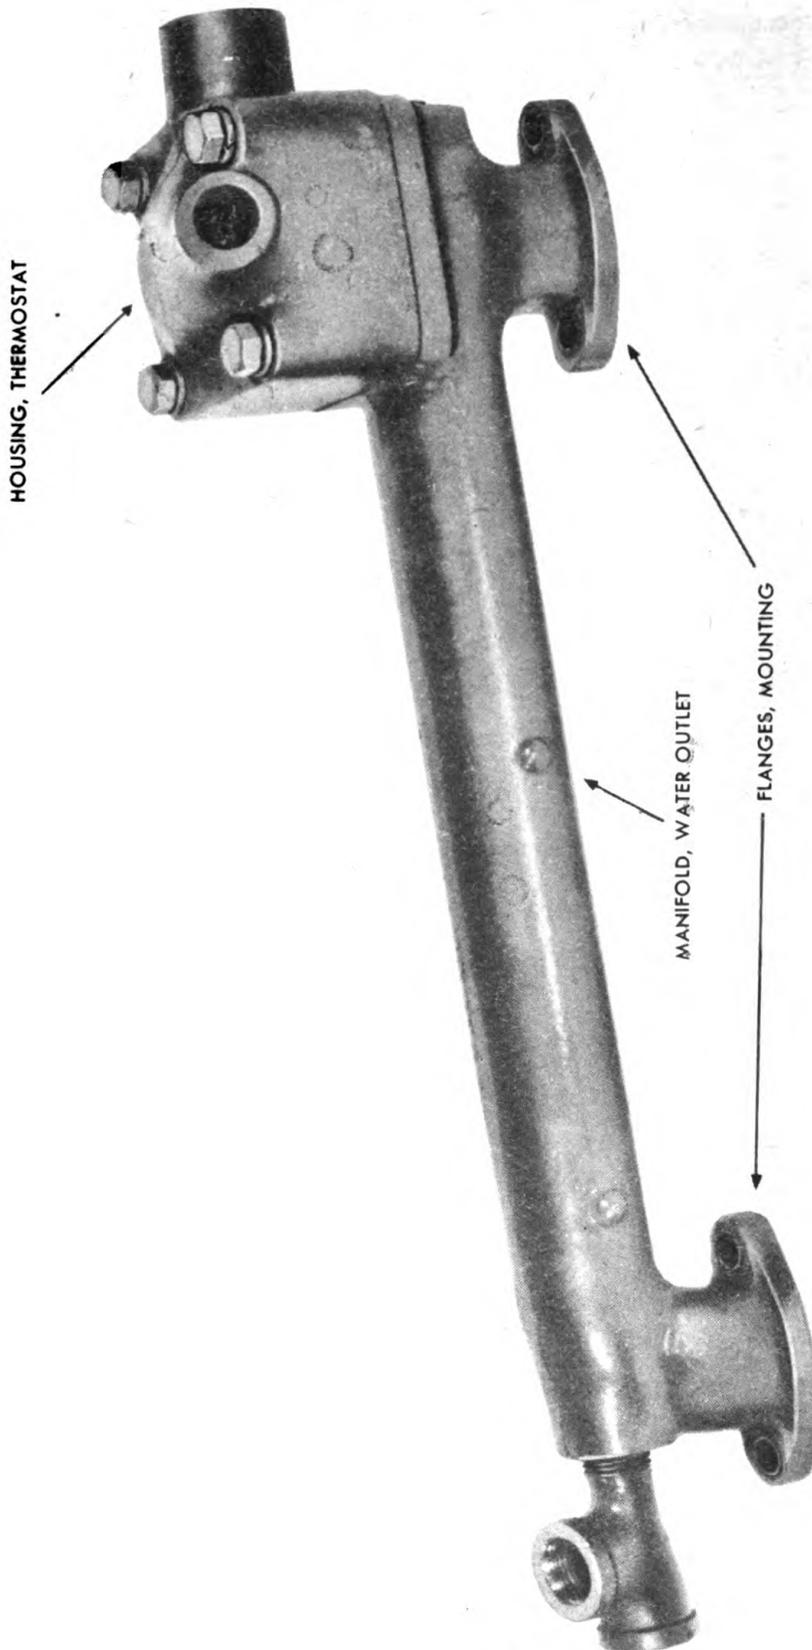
Water Outlet Manifold and Thermostat Housing Assembly
